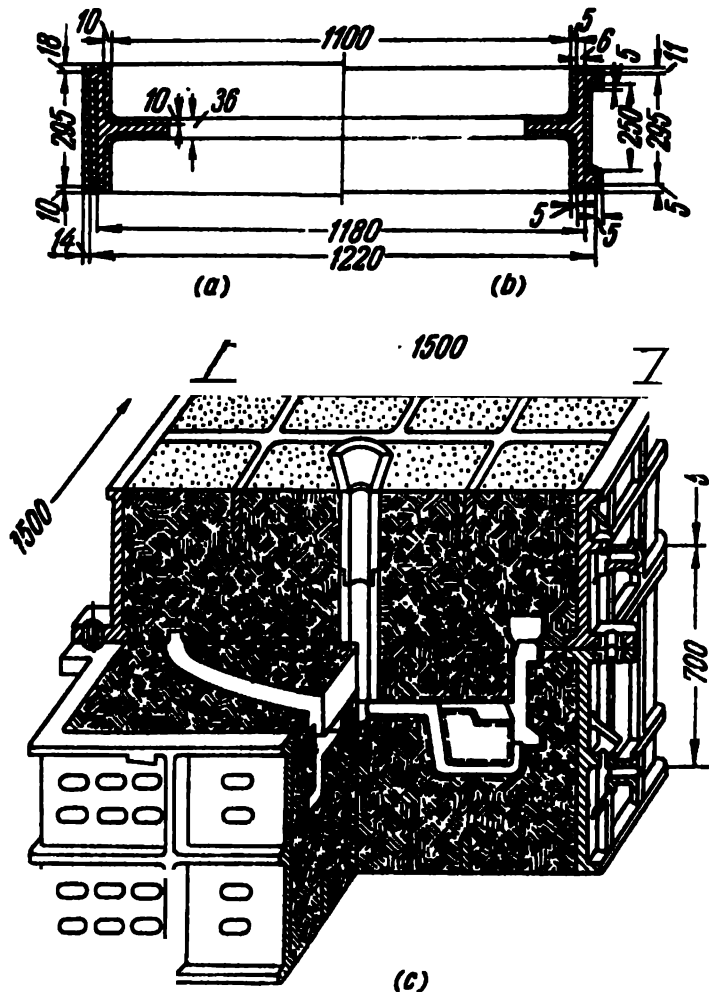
Mould for a sheave made from a split pattern after reducing the machining allowances on the external surface (Vasilevsky):
